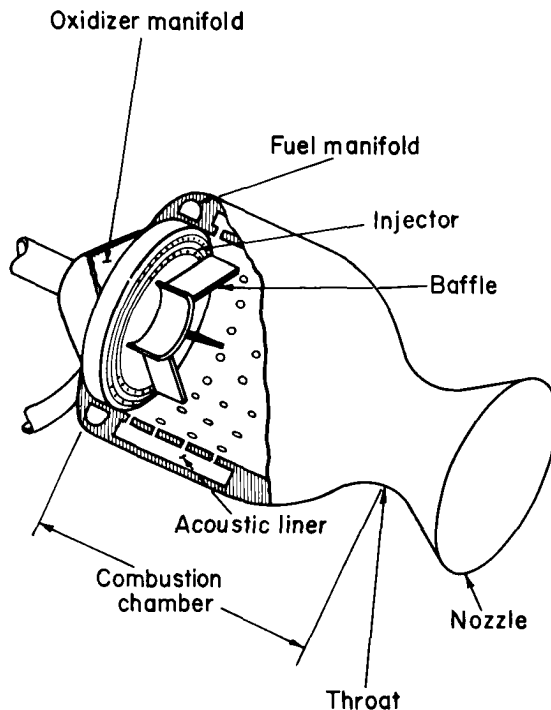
Typical components of a thrust chamber assembly.
